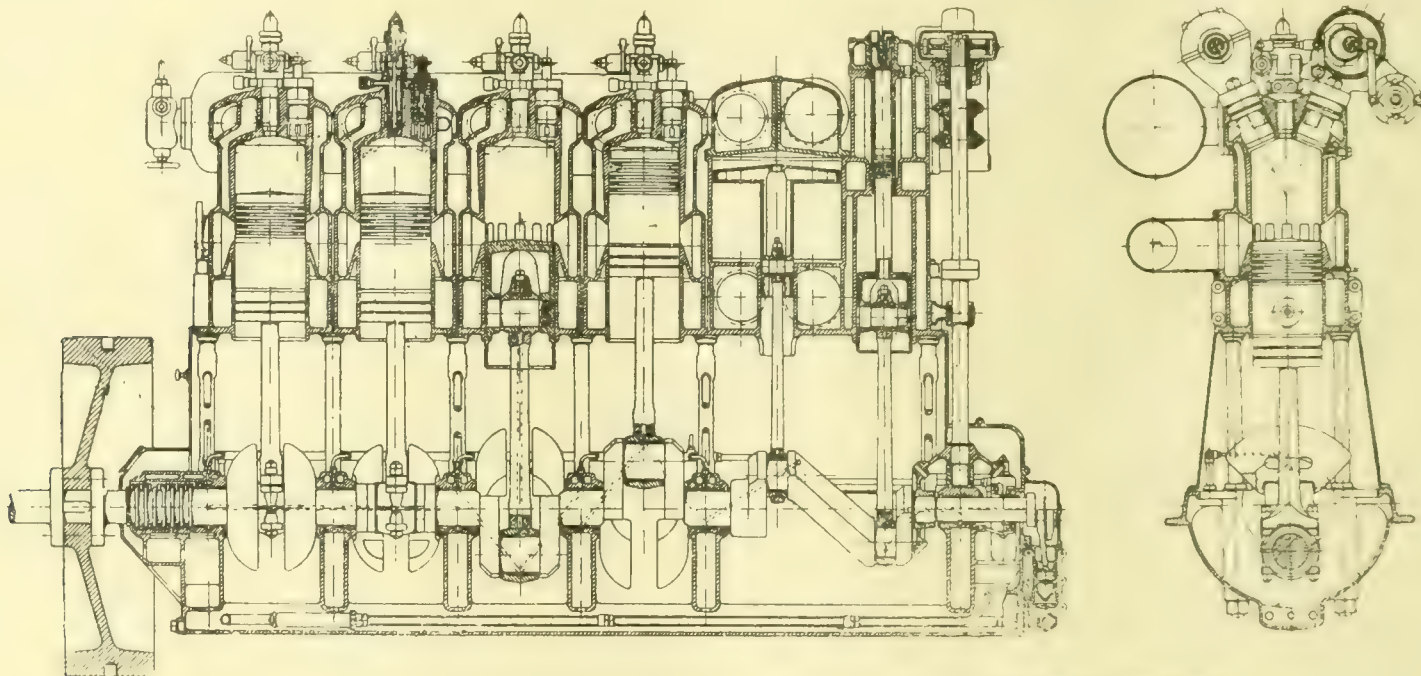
SINGLE-ACTING TWO-STROKE CYCLE ENGINE, WITH SEPARATE SCAVENGING PUMP. (SULZER.)
